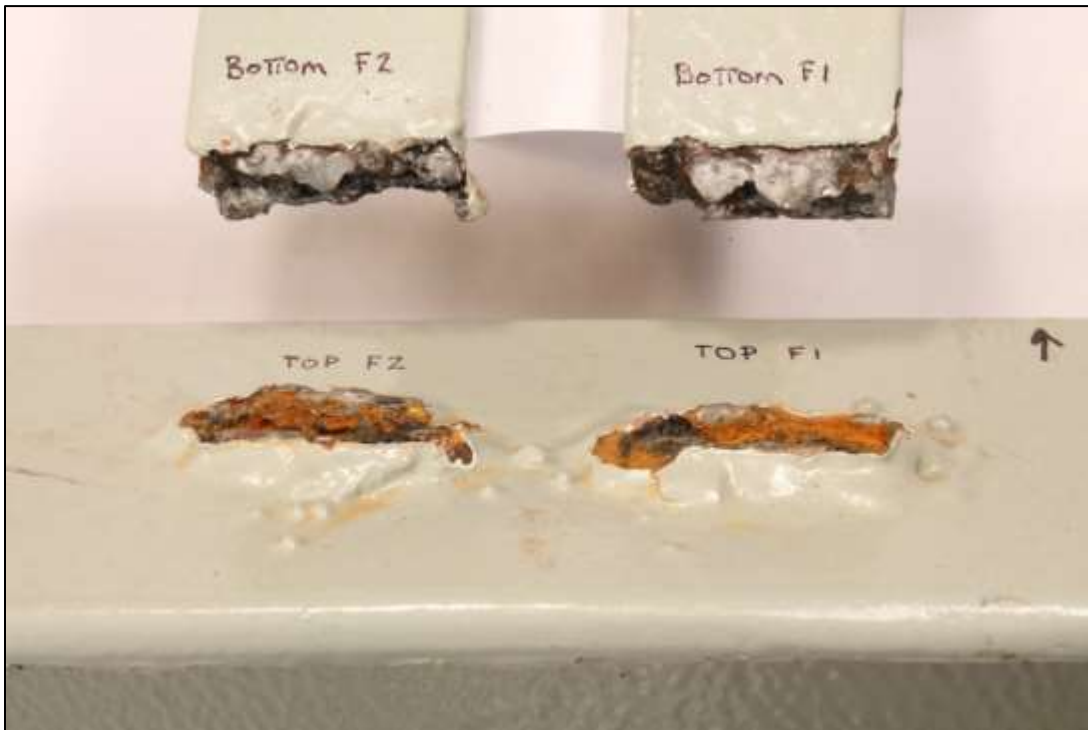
MATCO photo of fractures at the bottom of the left and right legs of the lug and the mating fractures on the top of the stiffening angle. Note light gray (shiny) fracture areas on the lug were the only portions of the bottom weld that adequately fused to the angle. The bottom face lug welds were subjected to tension loading.
